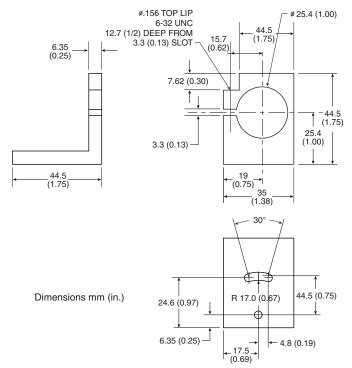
Optical Head, Mounting Bracket OS1592-MB
